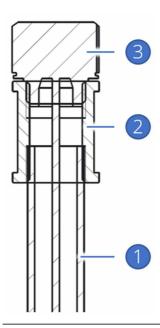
mechanical oil dipstick – installation angle 25,6° to 26,9°
